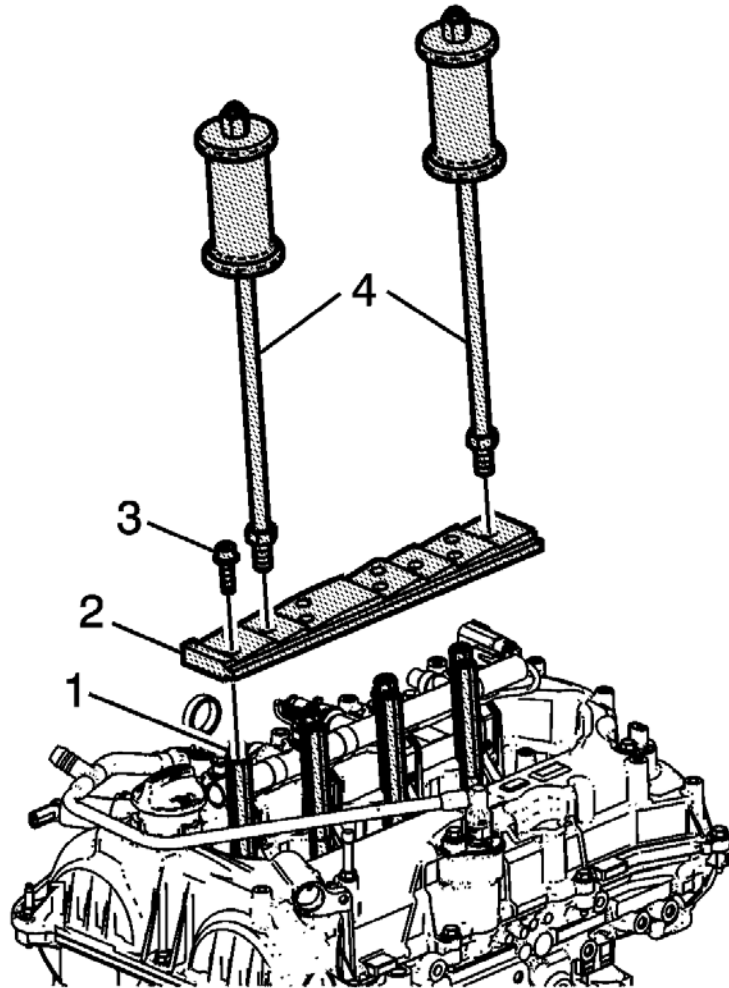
Plate, Supports, Bolts And Slide Hammers
